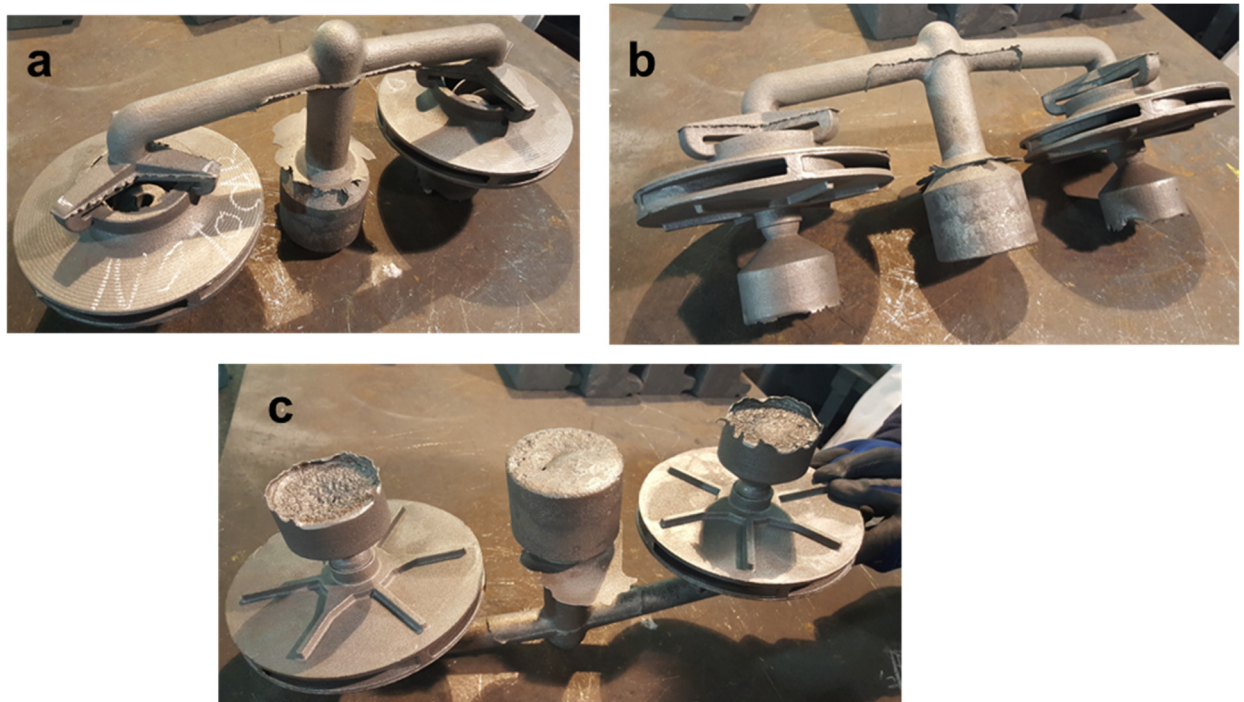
Casting impeller results: (a) upside view, (b) lateral view, (c) downside view.
